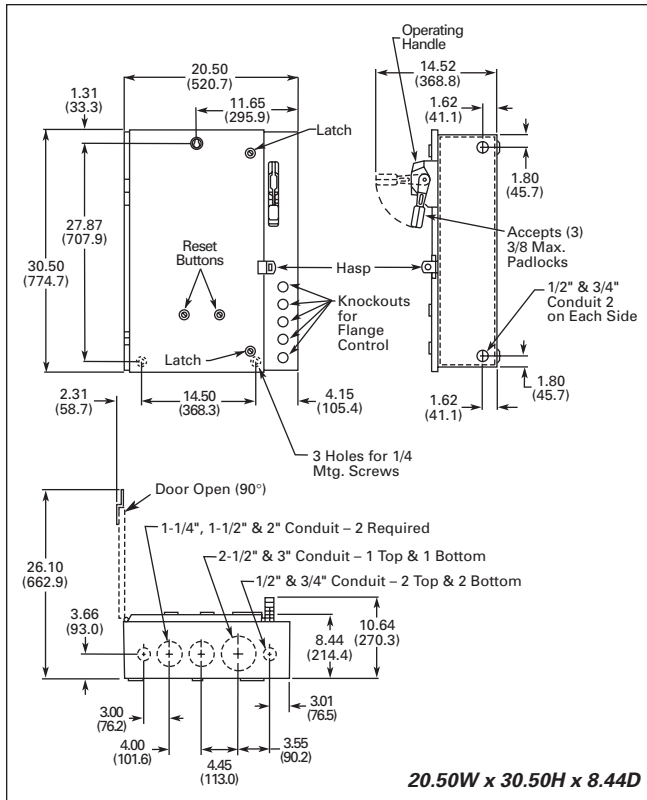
Box C, Type 1 — Approximate Dimensions in Inches (mm)
